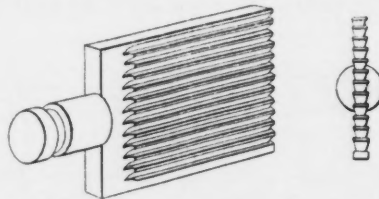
Tool for Facing the Ring Grooves of Piston Heads.
